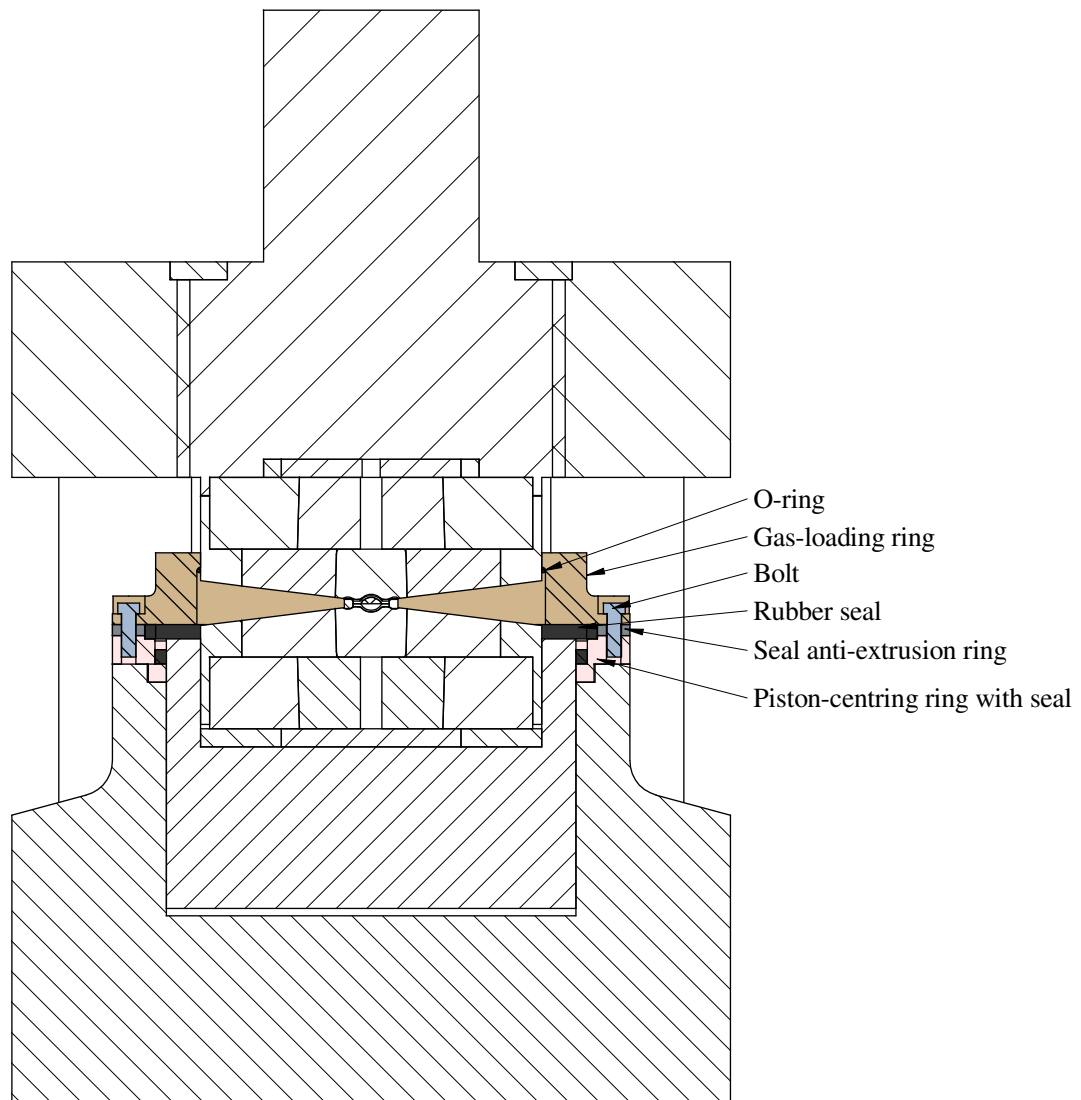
Modified design of the gas-loading ring. New parts introduced into the PEC assembly are shown in colour for clarity.
